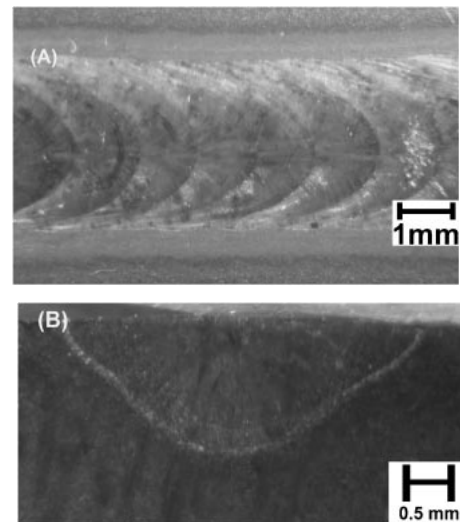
Weld bead of vibration welding. (A) Top view (B) Cross section.
